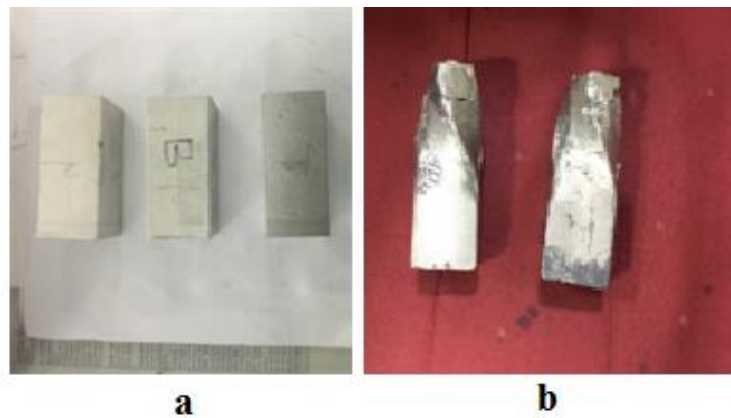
Composite samples(a) Before extrusion; 6(b).After extrusion.
